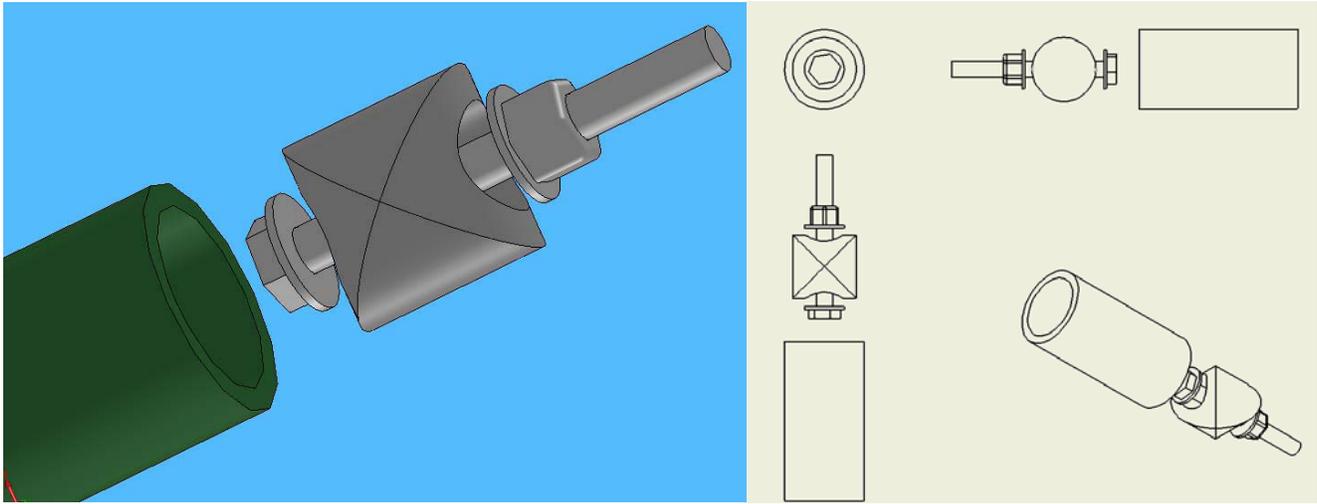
Second Alignment Assembly. This assembly requires only six pieces and can be easily tightened before positioning within the pylon. We plan to test the effectiveness of larger versions of the assembly this summer.
